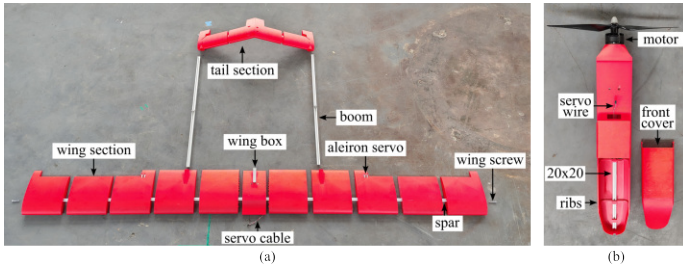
Exploded view of the UAV: (a) segmented wing assembly and (b) fuselage assembly.
